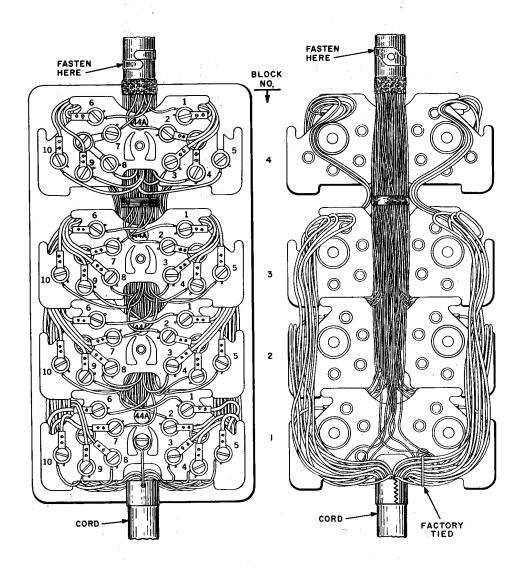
Arrangement of Four 44A Connecting Blocks Used With 500 Series Key Telehone Sets Equipped With Vinyl-Jacketed Mounting Cord
